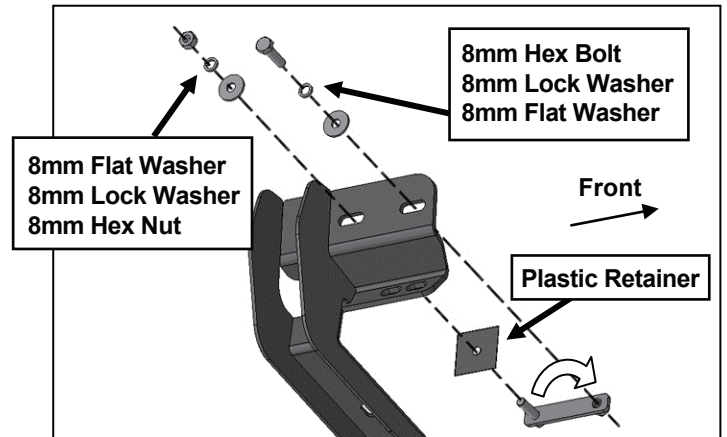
Use the loose Hex Bolt as a handle. Insert the Bolt Plate into the oval hole and feed the threaded end out either factory hex shaped hole. IMPORTANT: Do not let go of the hex bolt until after Plastic Retainer has been threaded onto bolt (Fig 5)
